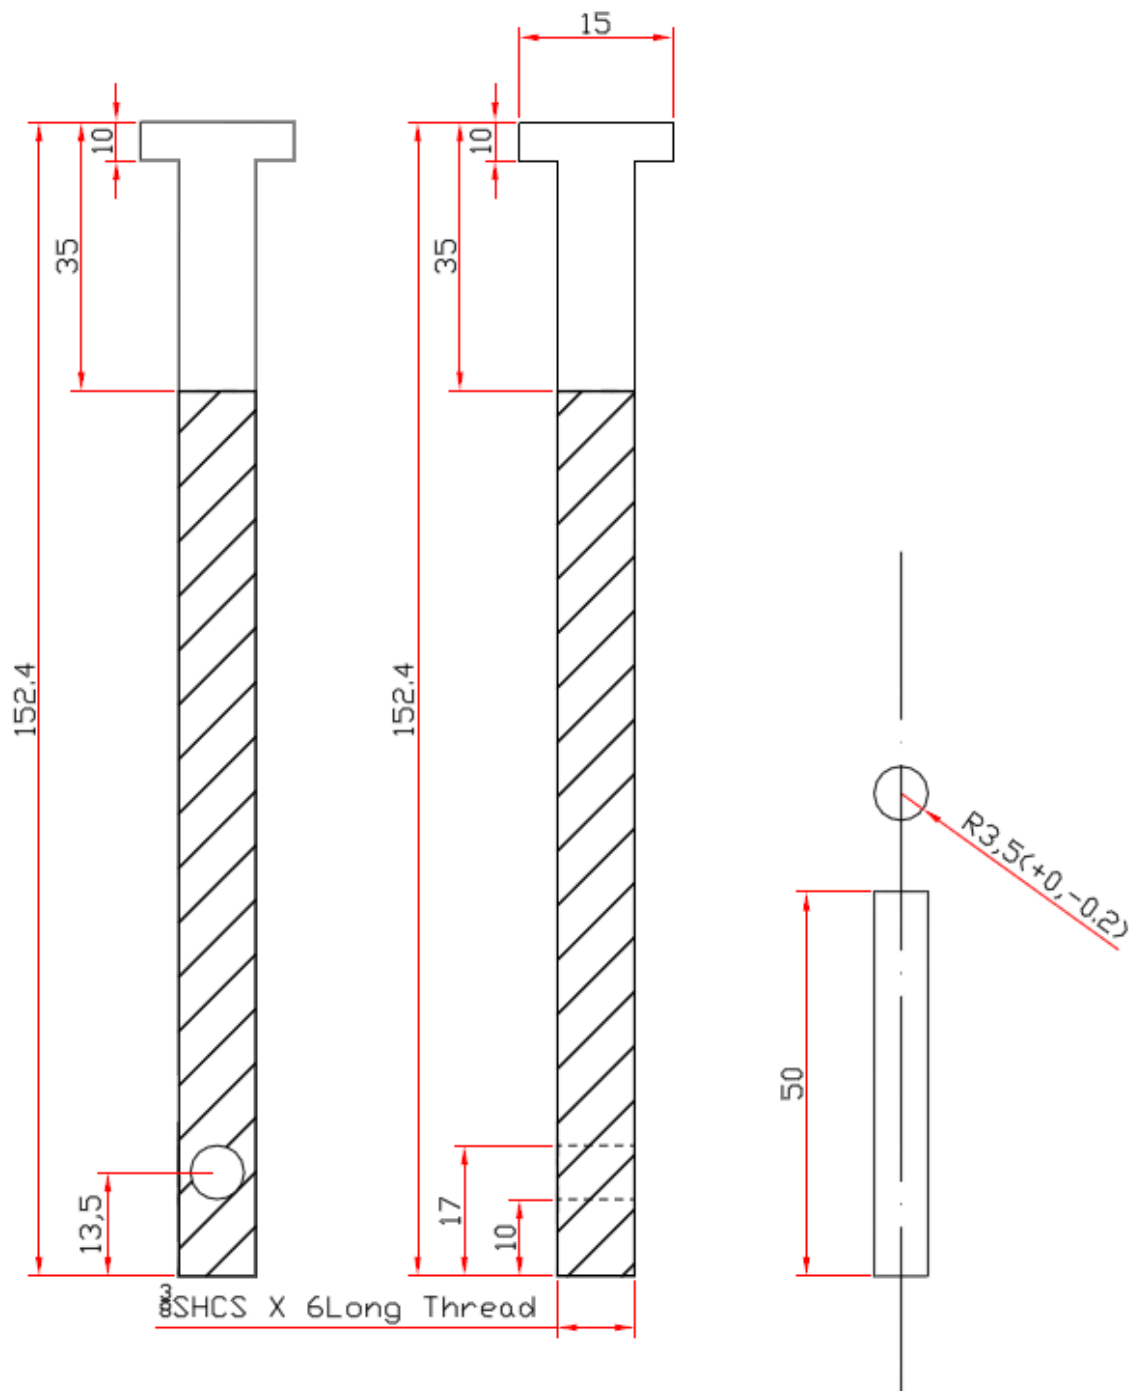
Thread shaft (x1), Installed through the movable block and fixed the end at unmovable block, AISI 4130
